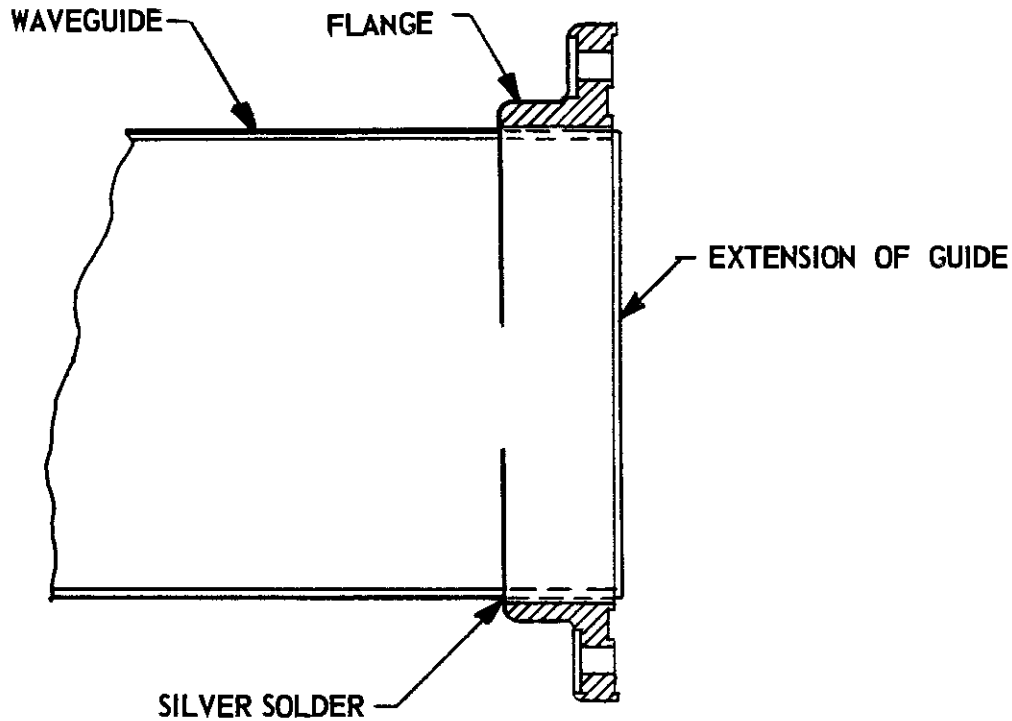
Waveguide and Flange Assembly - Sleeve Design
